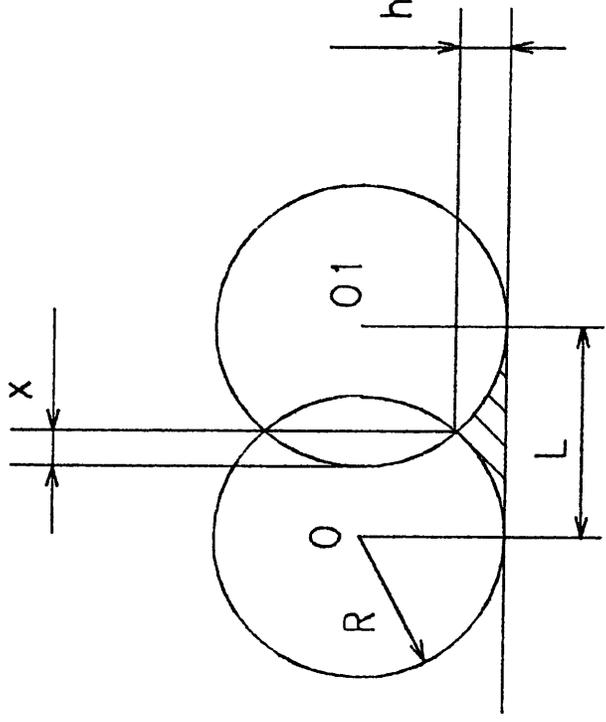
The calculation of cusp height for machining flat surfaces with ball-ended tools
